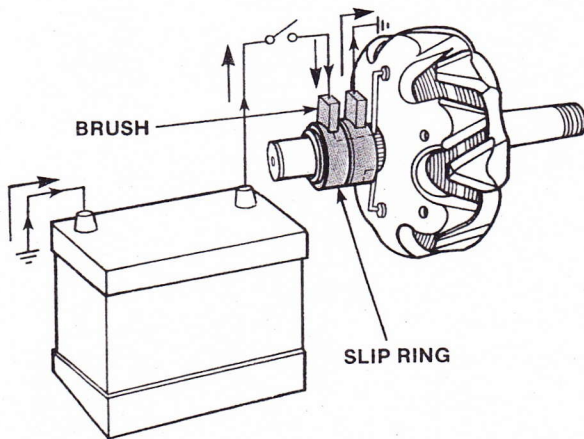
Current is carried by the brushes to the rotor windings via the slip rings.
